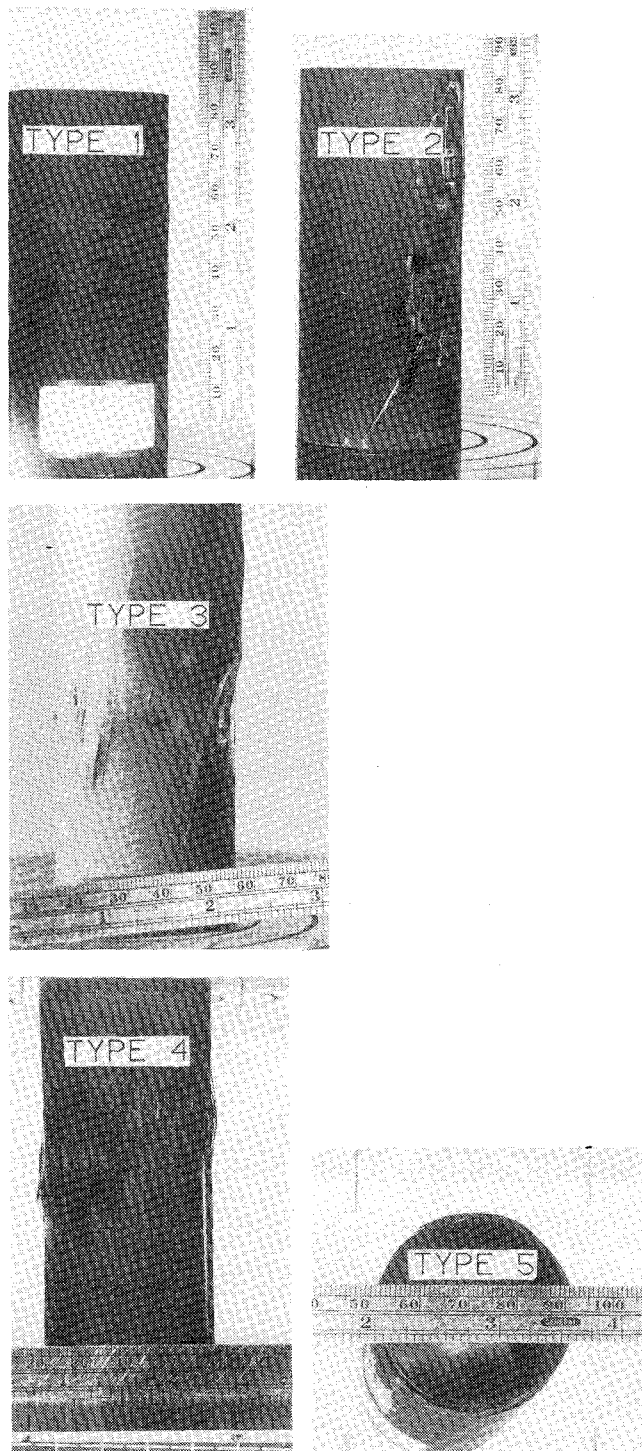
Five observed failure modes: type 1, in-plane fracture; type 2, in-plane splitting; type 3, shell buckling; type 4, ply buckling; and type 5, end failure.
